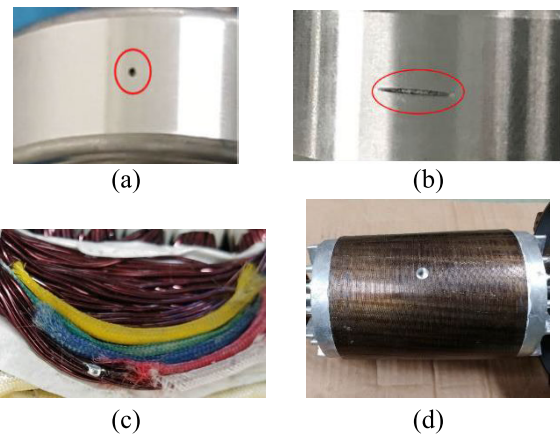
Artificially introduced faults. (a) Hole fault on the bearing. (b) Scratch fault on the bearing. (c) Short circuit of the winding. (d) Broken rotor bar.
